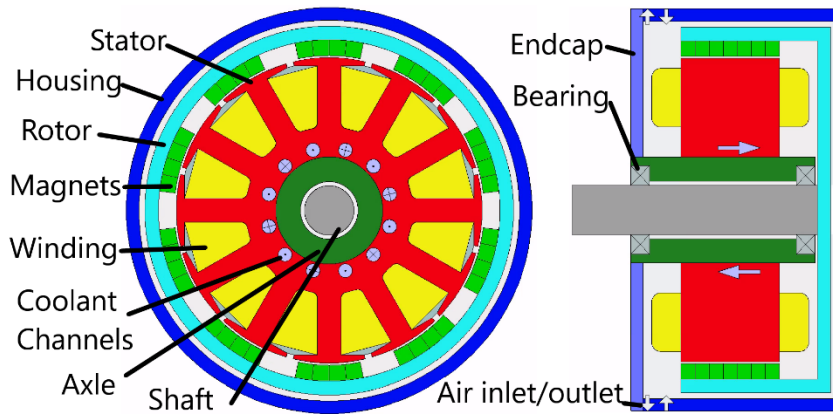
12/10 outer rotor configuration top view (left), side view (right)
